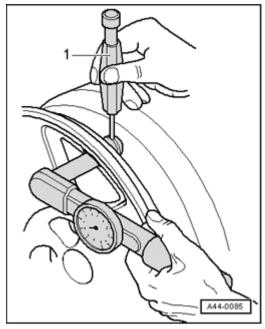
Securing Against Turning With Counter Hold Courtesy of VOLKSWAGEN UNITED STATES, INC.
